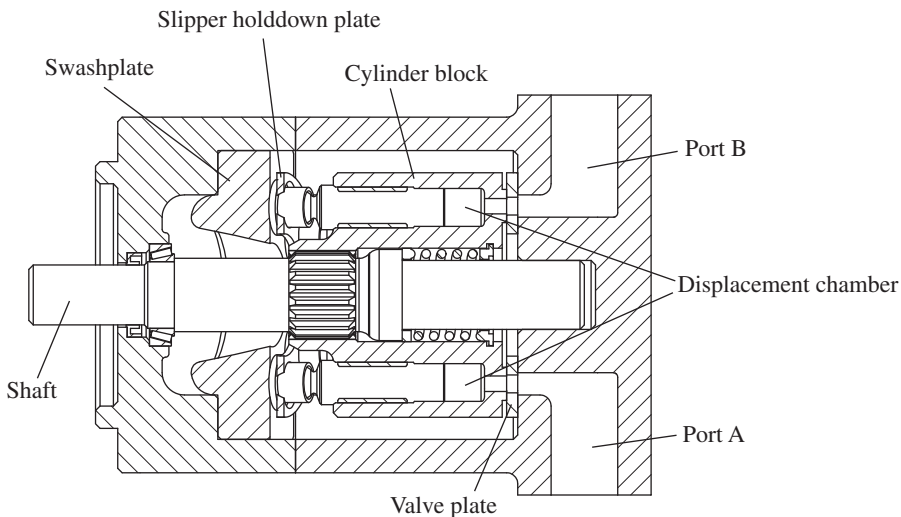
Swashplate-type axial piston machine horizontal cross-section.
